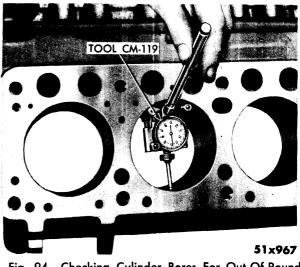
Checking Cylinder Bores For Out-Of-Round or Taper
